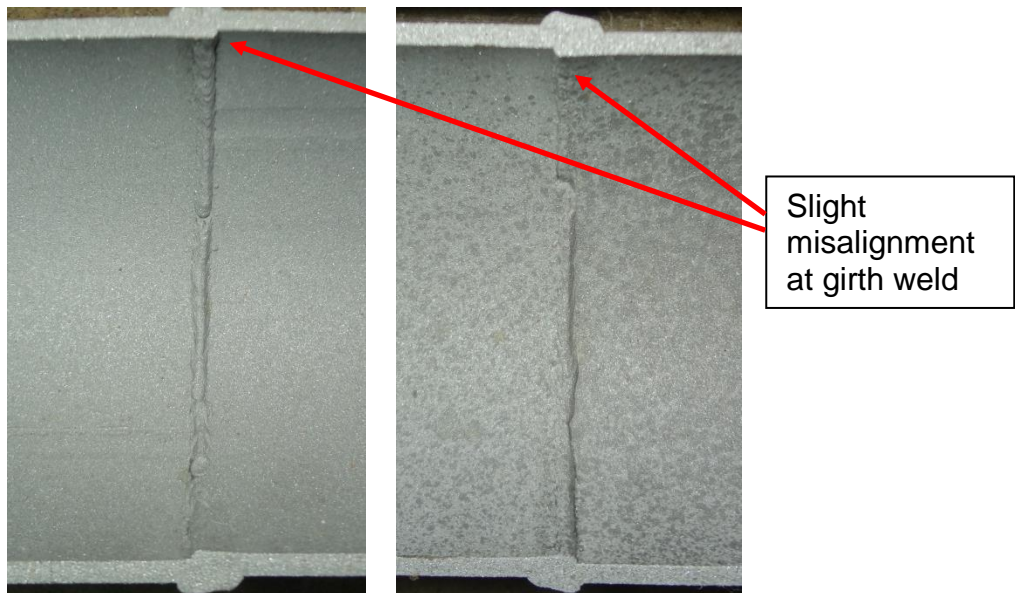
Girth Weld top and bottom slight misalignment
